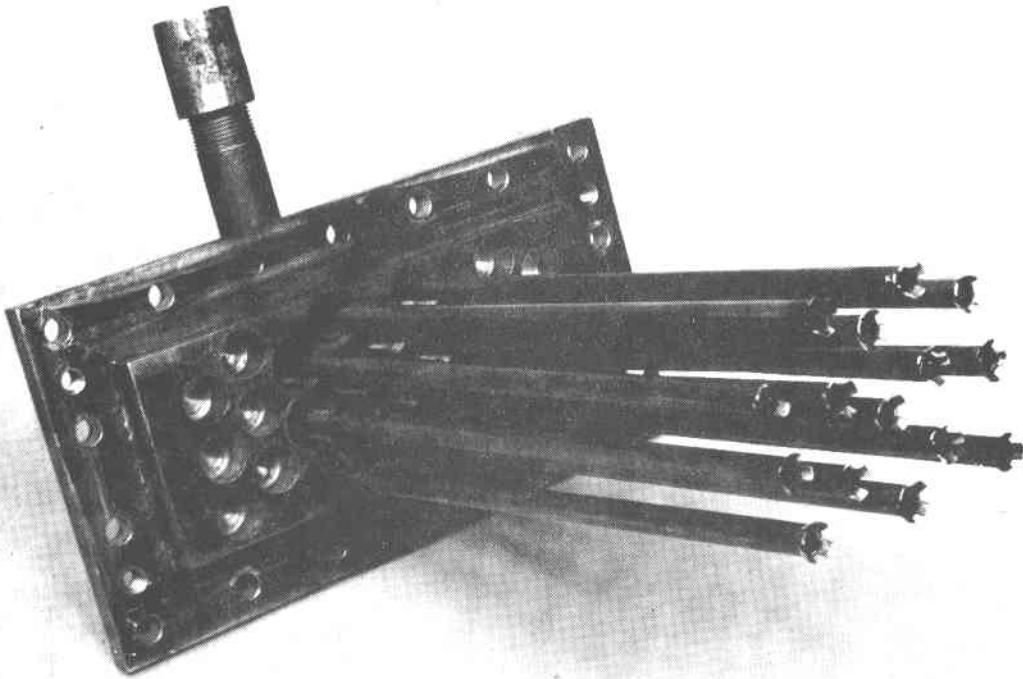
Flowby Module Tube Bundle with Inner Tubes Exposed
